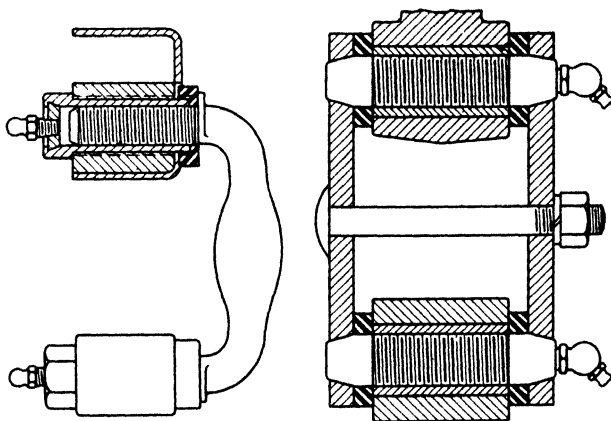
(left).—C-SHACKLE WITH INTEGRAL THREADED PINS.
